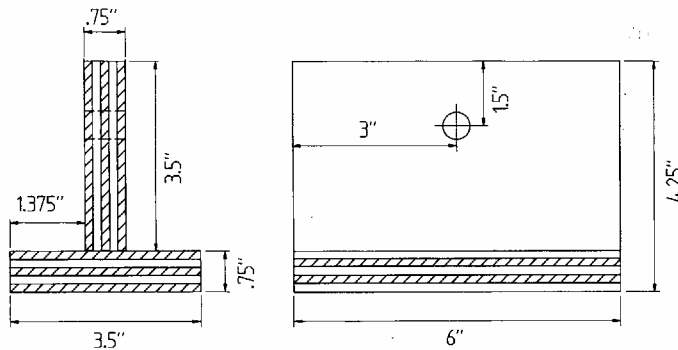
Geometric dimensions of edge withdrawal specimens.
